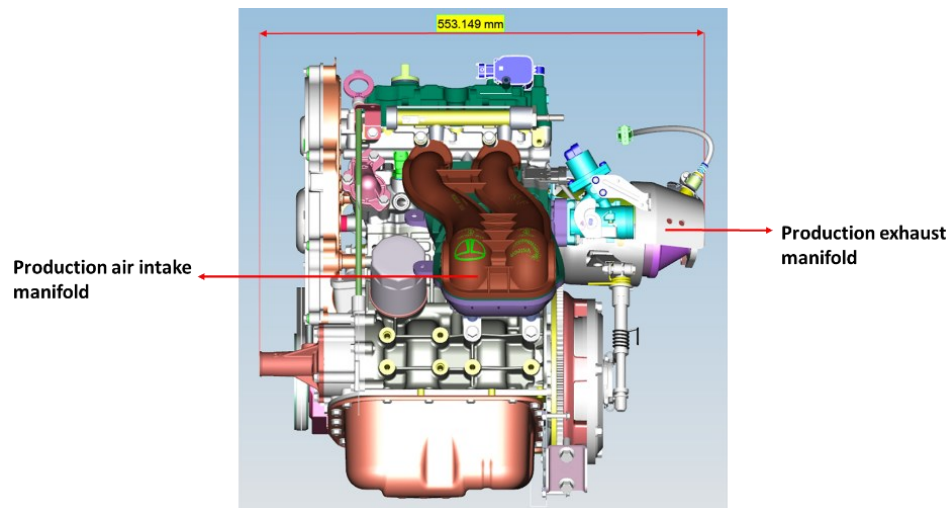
Engine overall dimensions with intake, exhaust and after-treatment, viewed from inlet manifold side [6]
